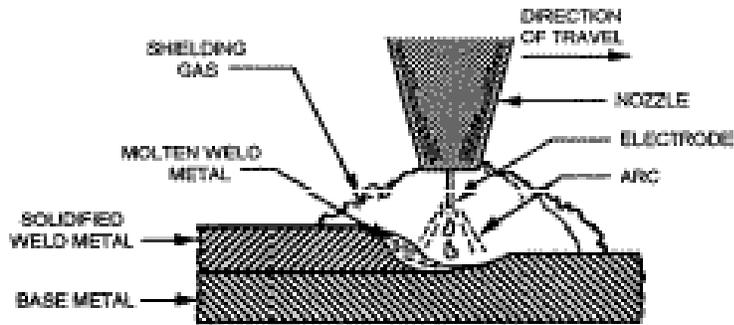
Gas Metal Arc Welding (GMAW)
